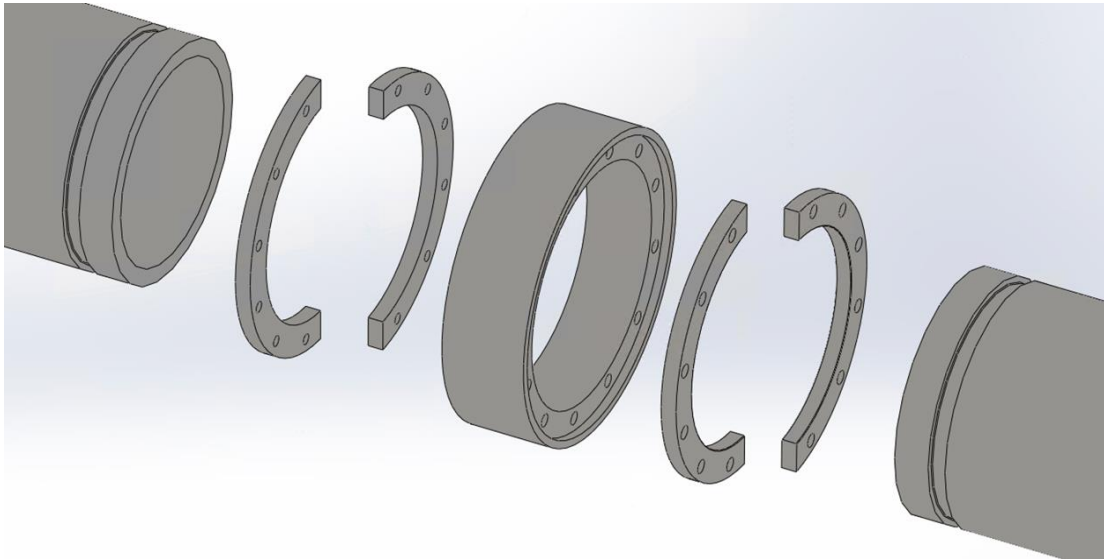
Exploded view of driven tube joint with weldless flange couplings.
